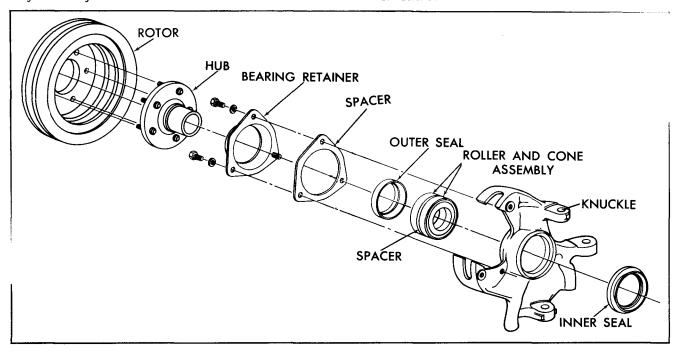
Front Hub, Bearing And Knuckle Disassembled (Eldorado)
